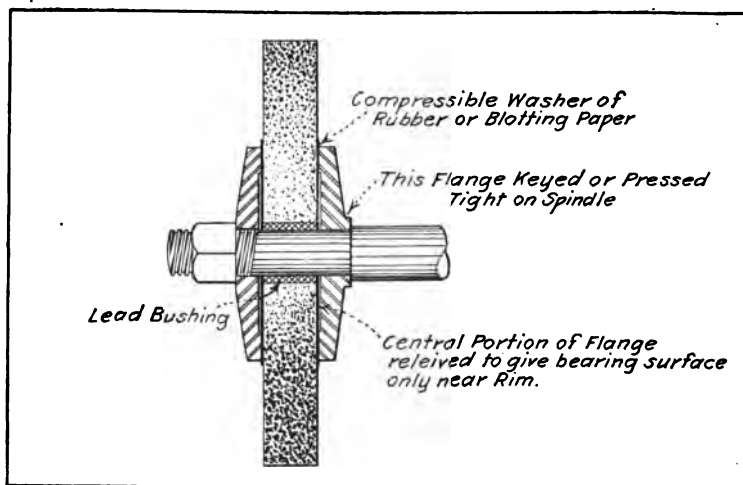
CORRECT MOUNTING FOR A GRINDING WHEEL
